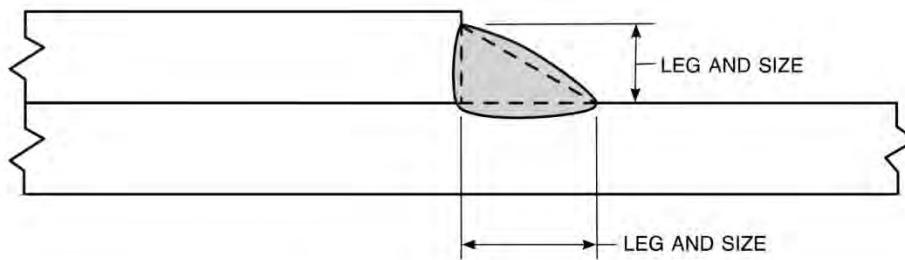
Leg Length of a Lap Fillet Weld
